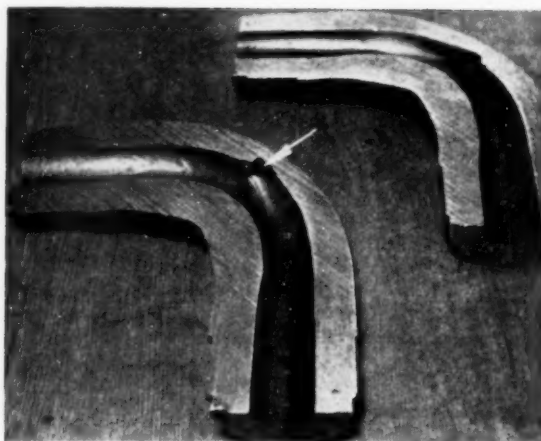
ERODED 1-IN. HIGH-PRESSURE ELBOW
